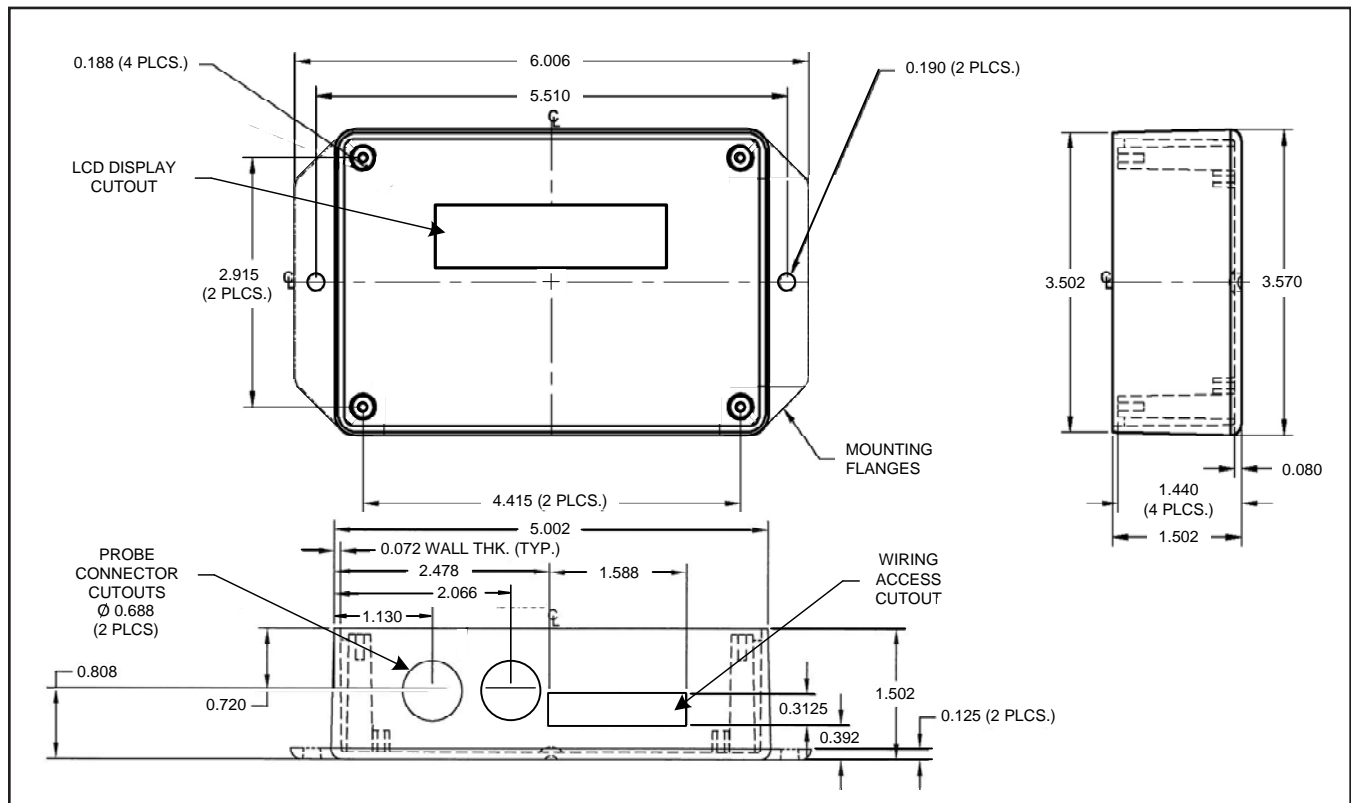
GF-2100-A/GF-2200-A Transmitter Mechanical Detail Drawing
